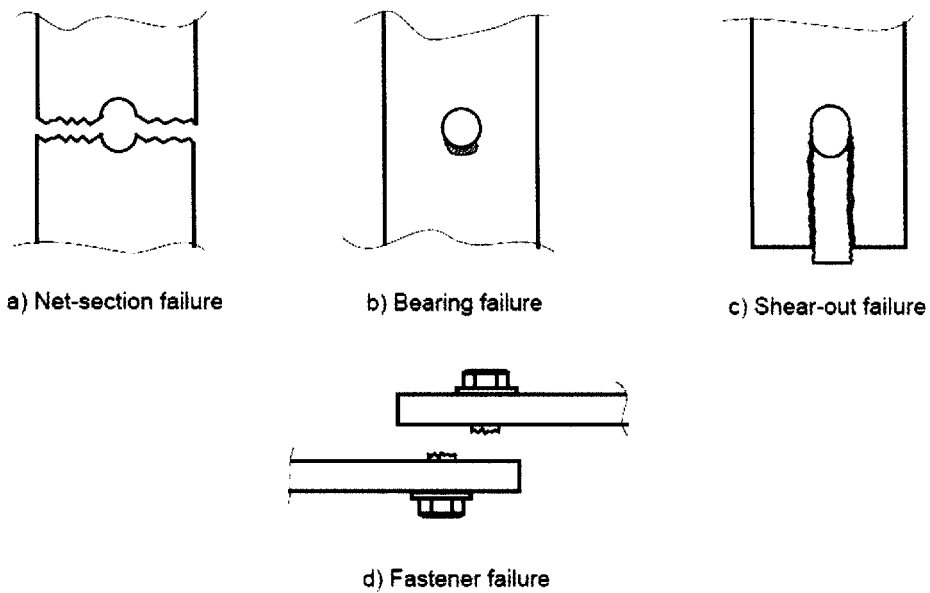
Failure Modes of Composite Bolted Joints (Ref. 5.1)
